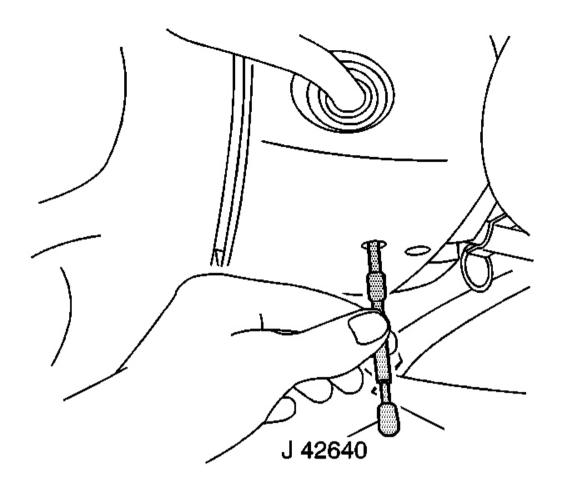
Inserting J 42640 To Lock The Steering Column Courtesy of GENERAL MOTORS CORP.
